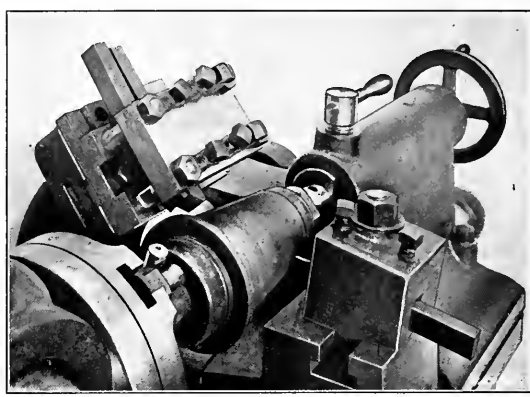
Tools shown in Detail in Figs. 6 and 7, set up on Fay Automatic Lathe
